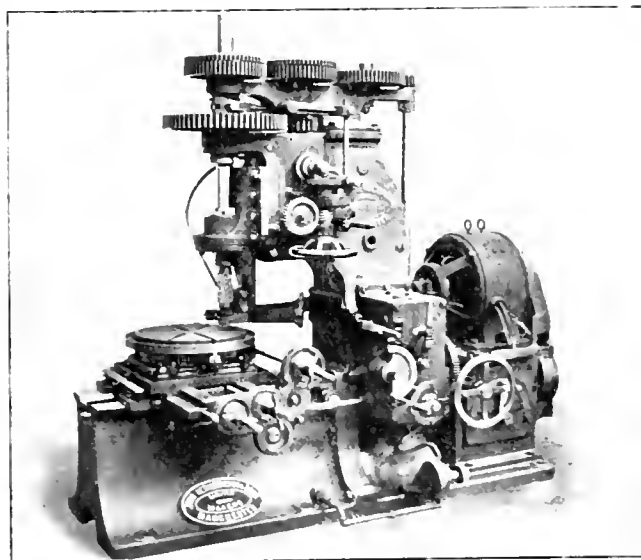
Hetherington Vertical Drilling and Milling Machine.
